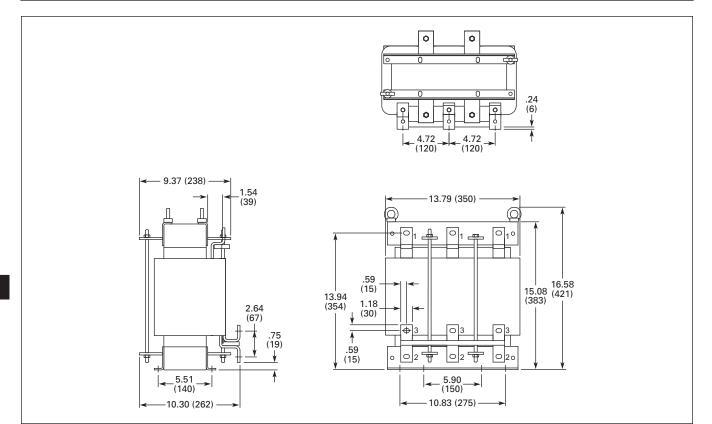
Dimensions of AC Choke CHK0400 in Inches (mm)
